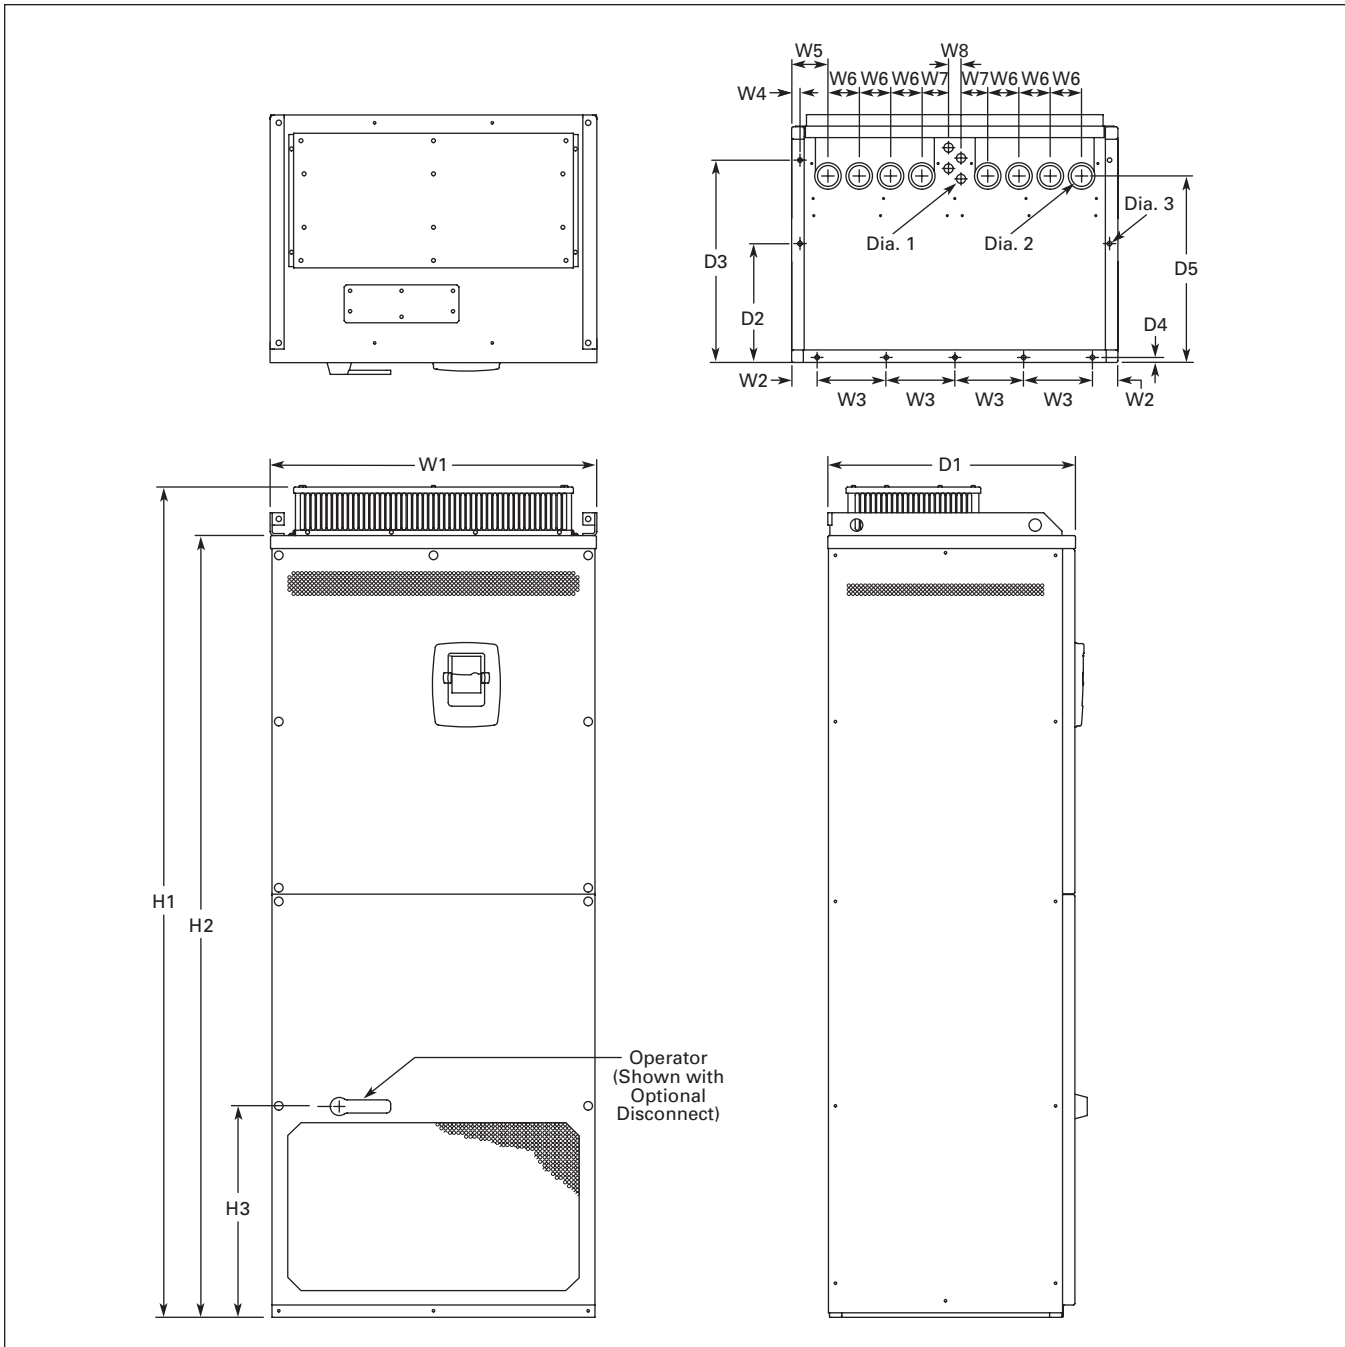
HVX9000 Dimensions, NEMA Type 1 FR11 Freestanding Drive
